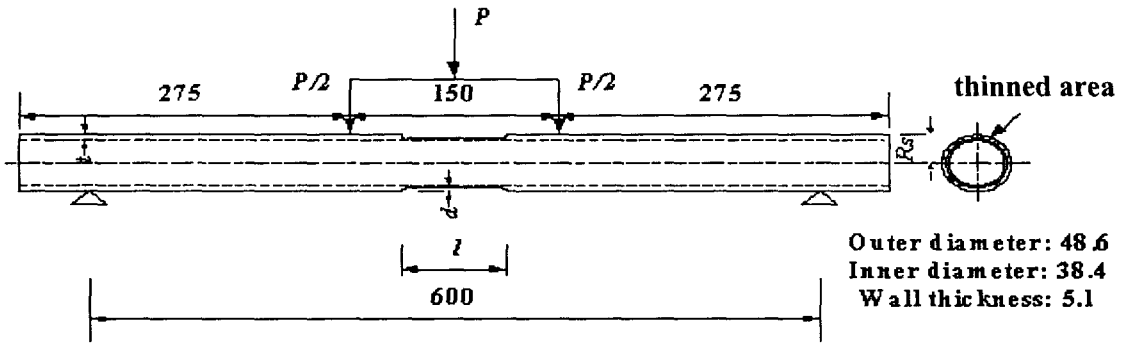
Shape and dimensions of a pipe specimen with wall thinning
